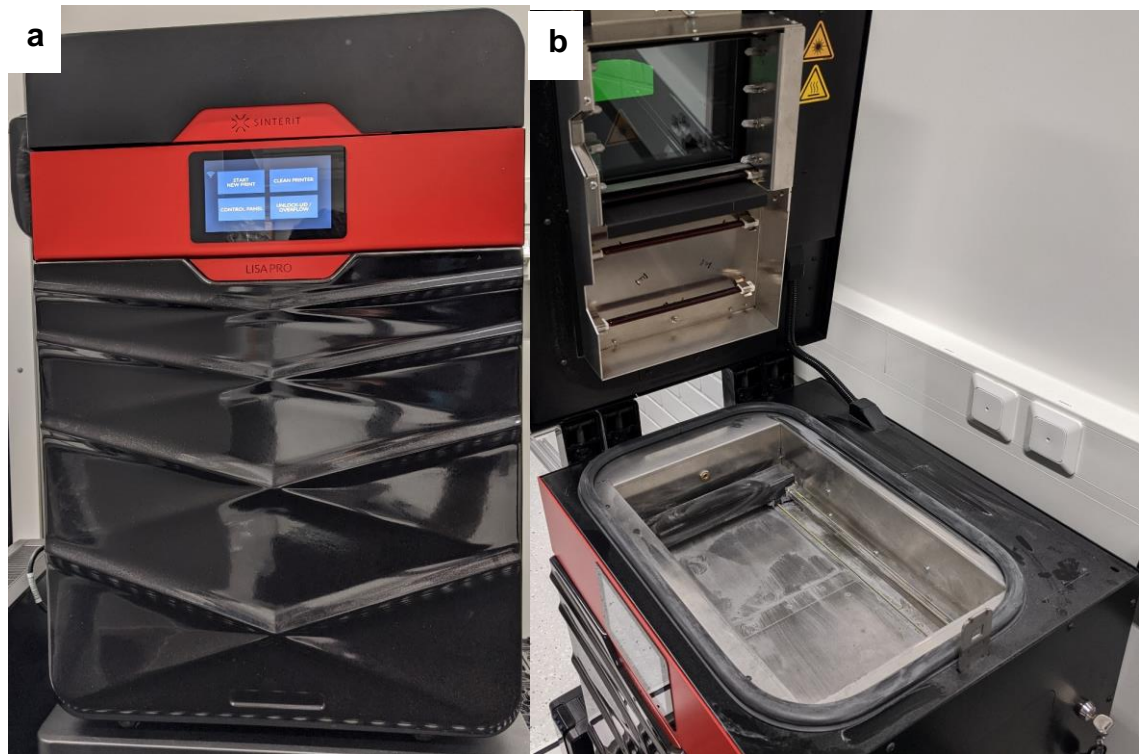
Front view of the Sinterit LISA PRO (a) and view of the open hatch, revealing the build chamber (b)
